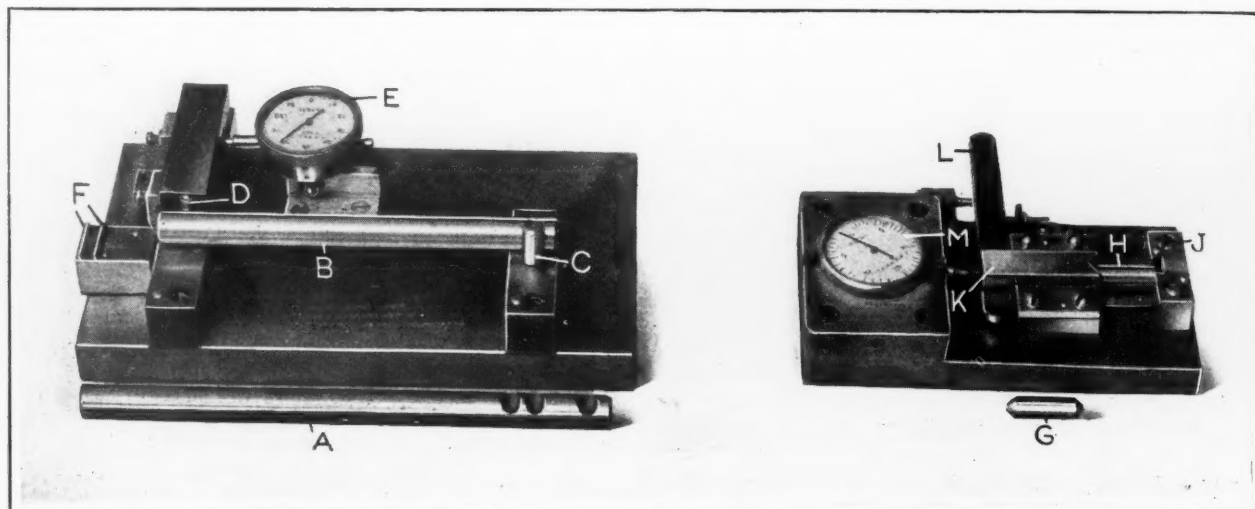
Two Fixtures equipped with Indicator Dials for inspecting Lengths of Parts
